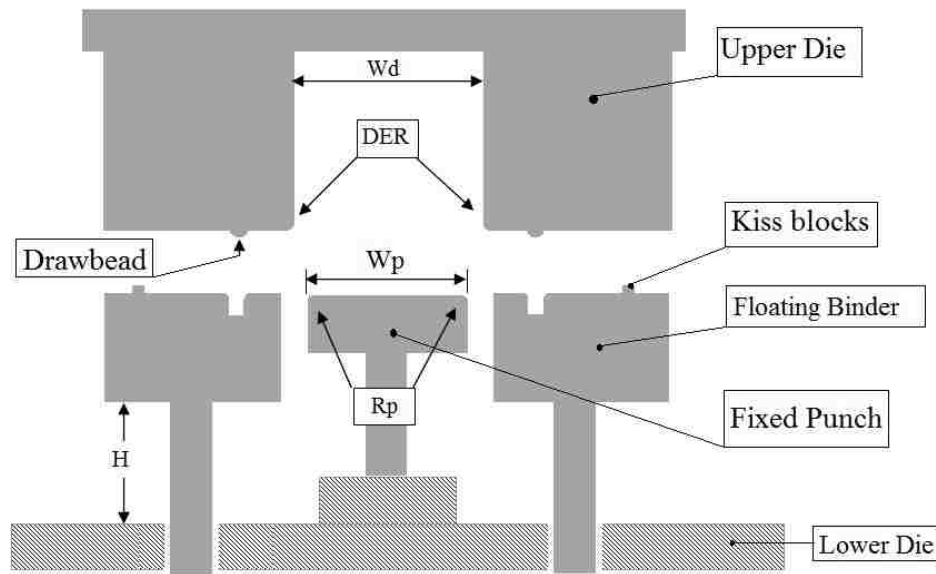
sideview of the A/SP die components and general dimension parameters
